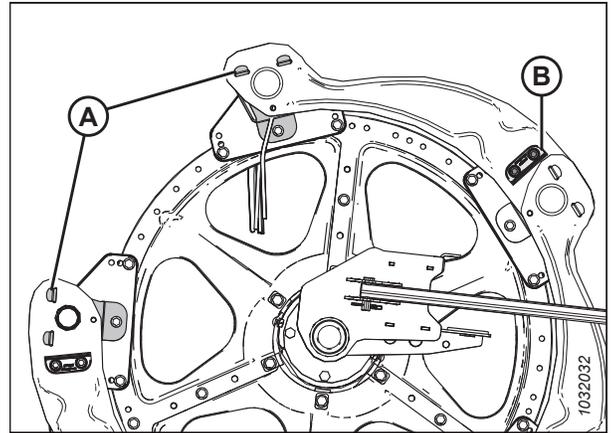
Reel Endshield Removed – Outboard Tail End
